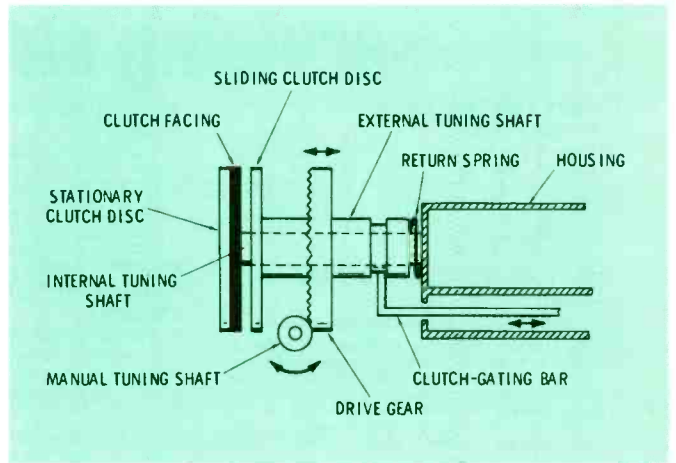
Details of the clutch which makes pushbutton operation easier.
